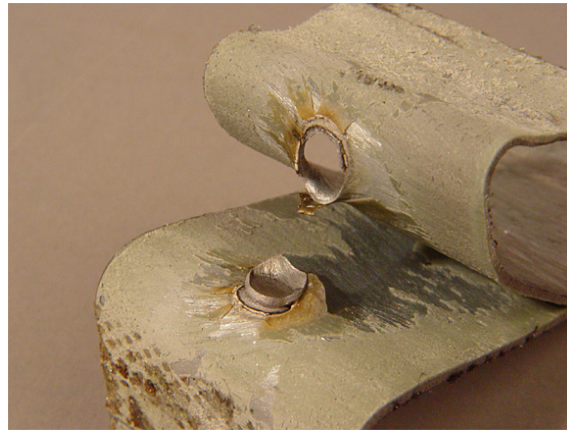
Spot weld failure due to peeling [17].
